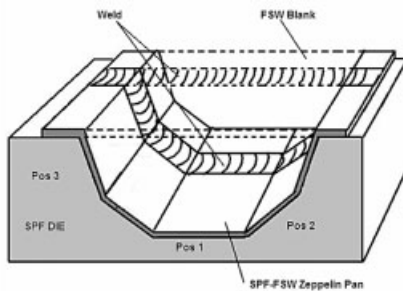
Schematic of zepelin pan SPF forming tool, showing the cross section of the die. The FSW weld on the blank is stretched down against the side and bottom positions to make flat facets, which are ideal for making tensile test coupons. Note that the flat facet formed into position 1 would typically have 70% superplastic elongation, while facets on position 2 will have 65% and position 3 will have about 40%.
